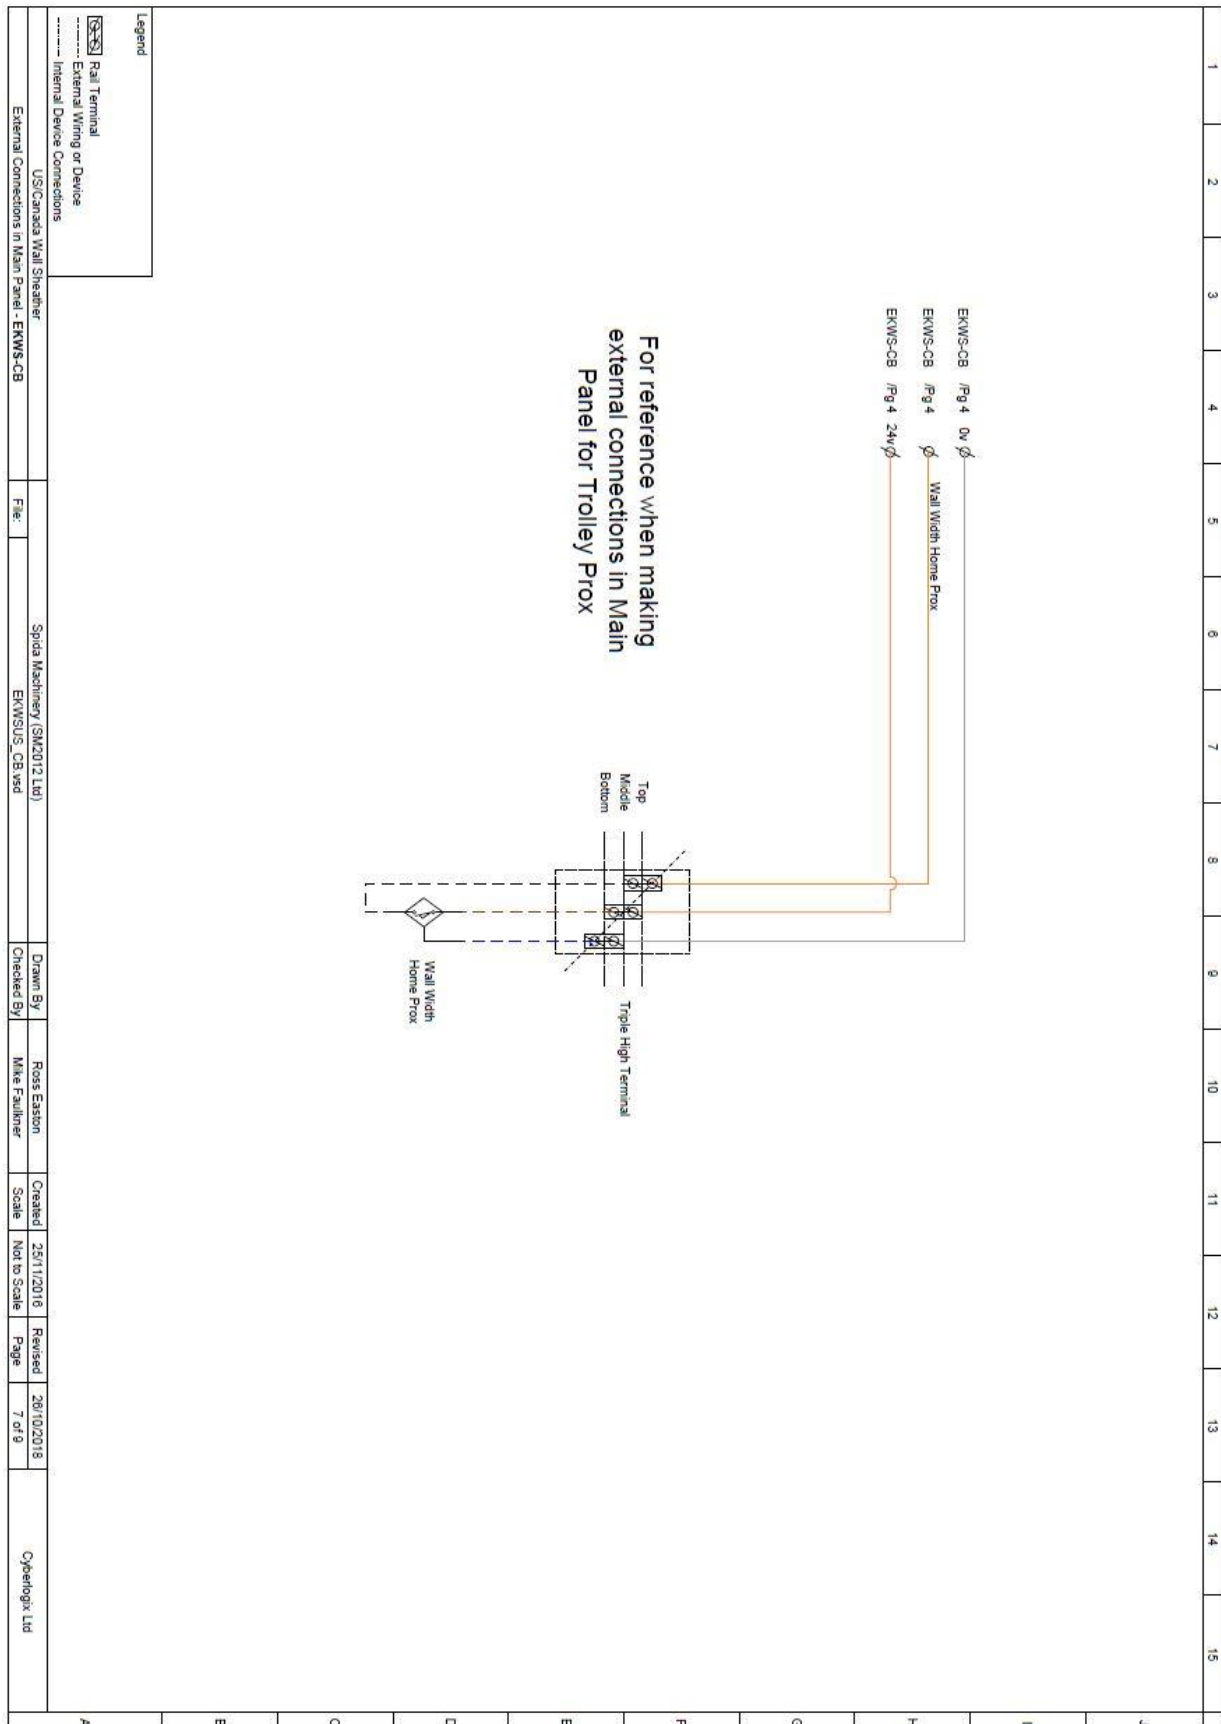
, Spida Auto Sheather Electrical Drawings US/Canada part 7
